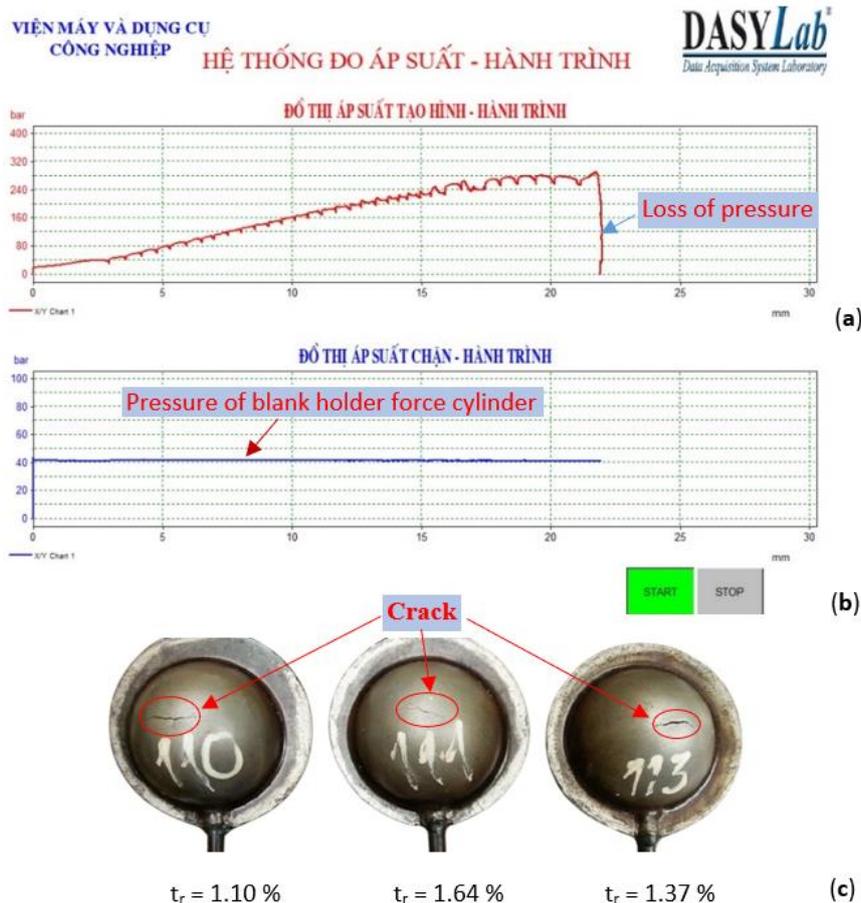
Measurement graph including (a) forming fluid pressure; (b) pressure of blank holder force cylinder; (c) defective formed part.
